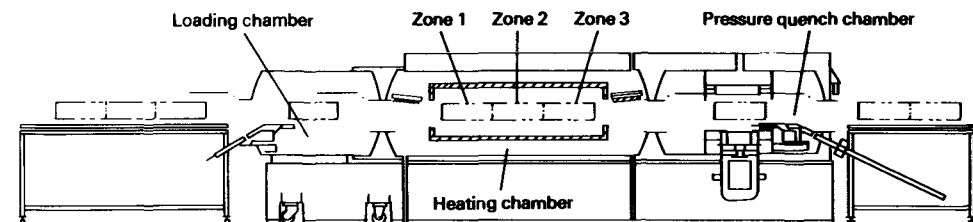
Schematic of a typical in-line multiple-chamber vacuum furnace
